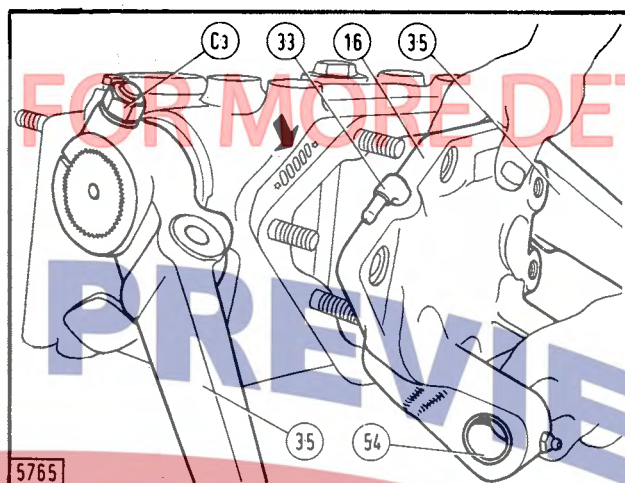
Removing rear cover. (C3) Clamping nuts. (16) Rear cover. (33) Oil line connection. (35) Lift arms. (54) Bushings.
